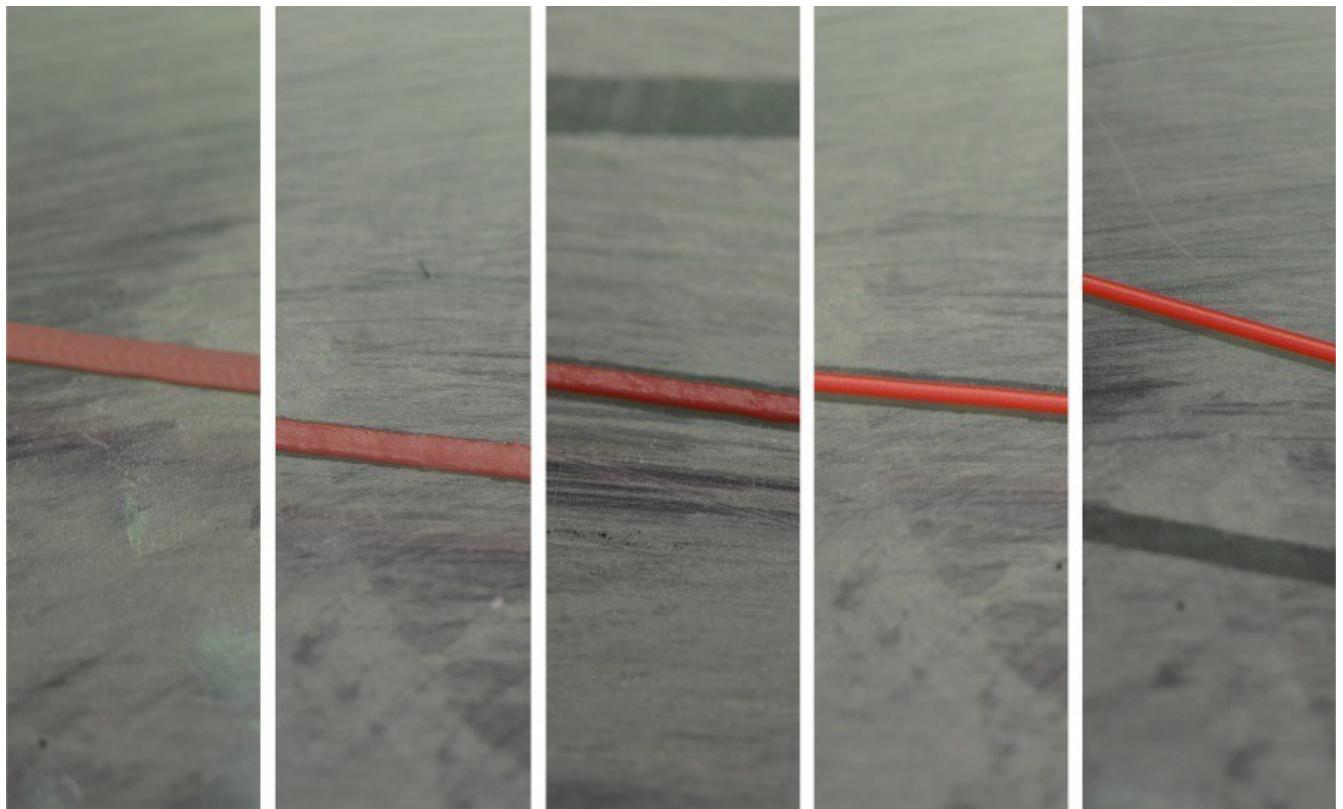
First print layer examples. (Image Courtesy of LulzBot)
